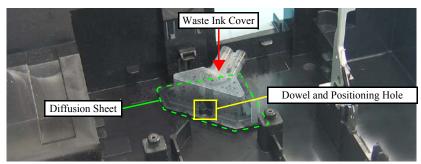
Removing the Waste Ink Cover and Diffusion Sheet
